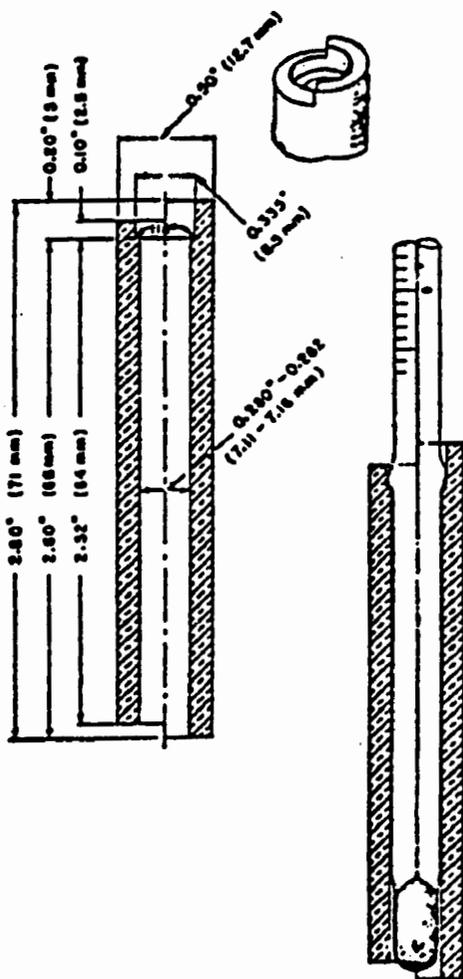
Test Gage for Checking Enlargements on Thermometers.
